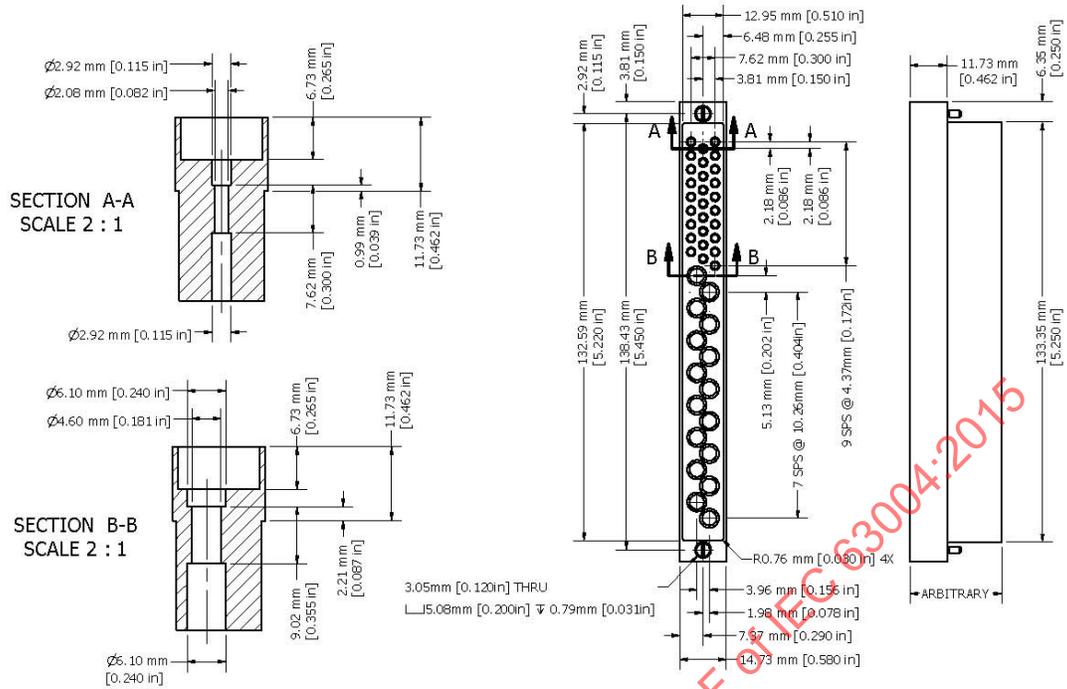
Mixed power module connector, 28-10 A/1 6-20 A position, fixture housing physical layout
